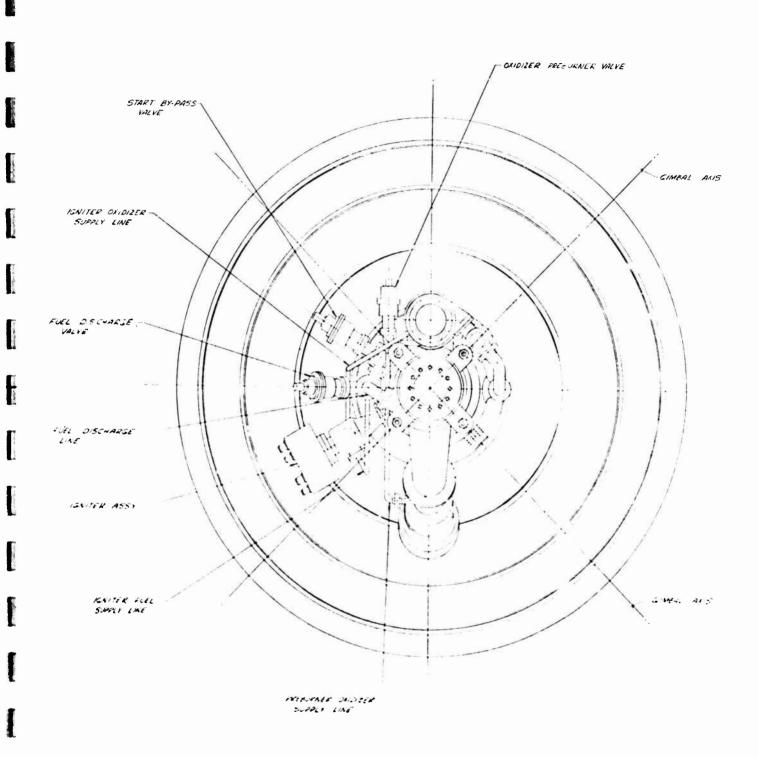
10K Engine In-Line Fuel Pump (Sheet 2 of 4)
